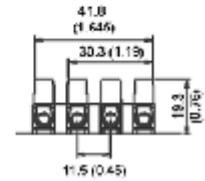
Drawing of Filter 2 - - Dimesions in mm (inch)
